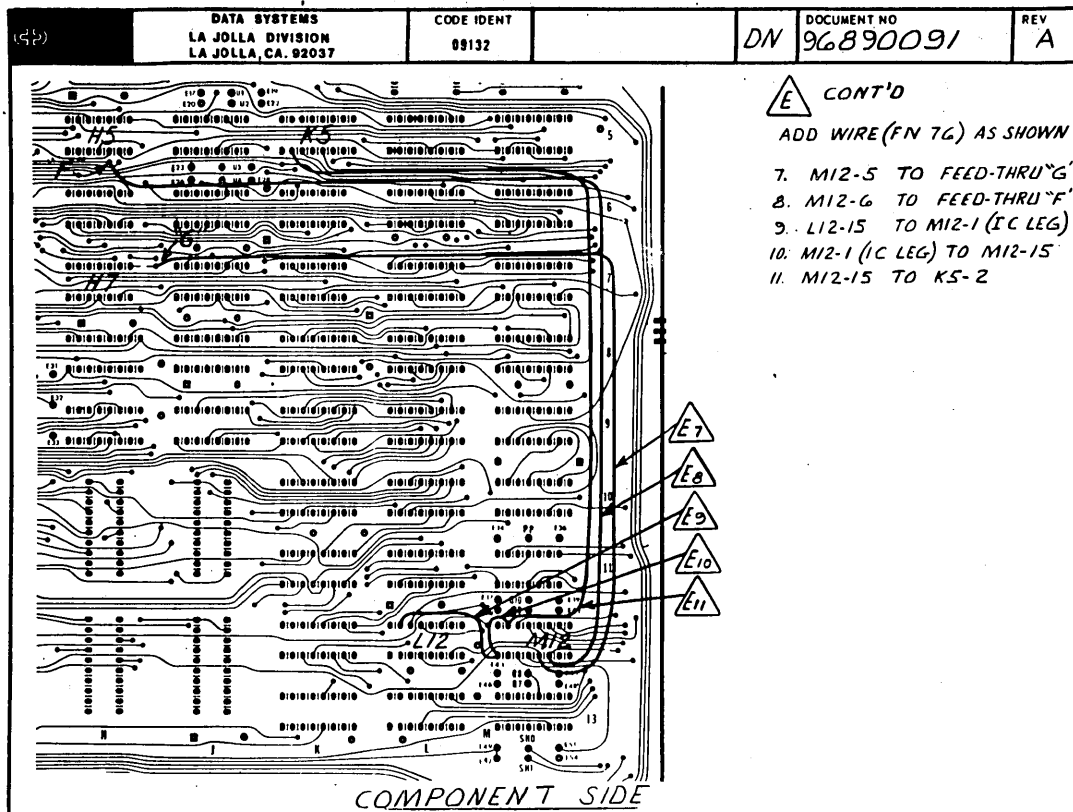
Module Drive Adapter Subassembly (96890091) (Sheet 5 of 7)
